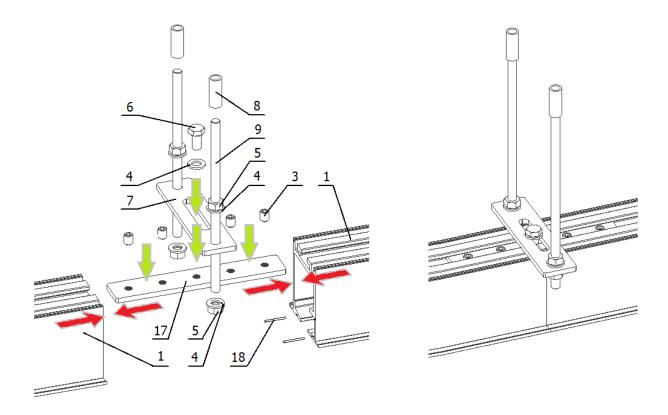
Scheme of track connection for 1-point suspension by means of a straight connecting plate (example for track 34-0131): red arrows - inserting the plate into the track sections; green arrows - twisting of the components of the track fastening
